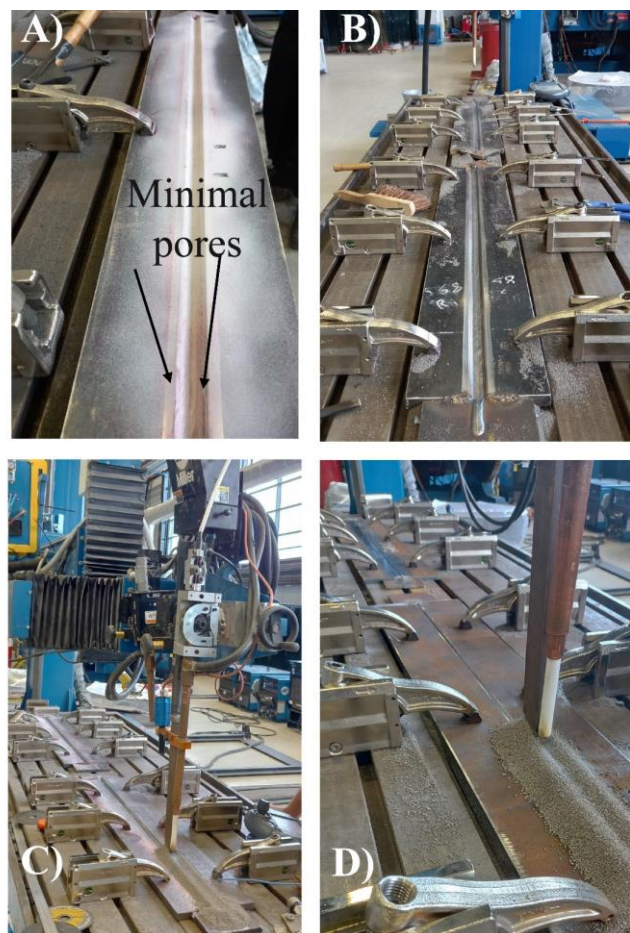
SAW steps: a) After Dye penetration inspection, b) Plate clamping, c) Welding setup, d) SAW process.
